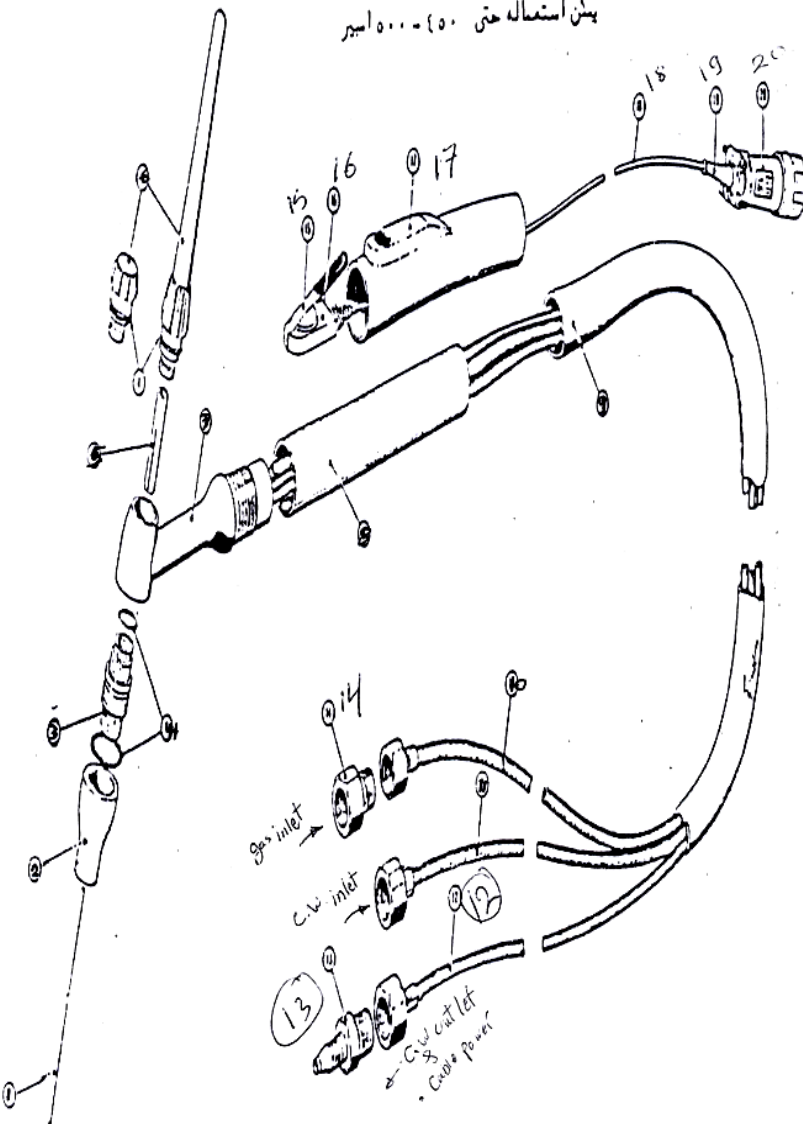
Water-cooled GTAW torch for manual welding.
